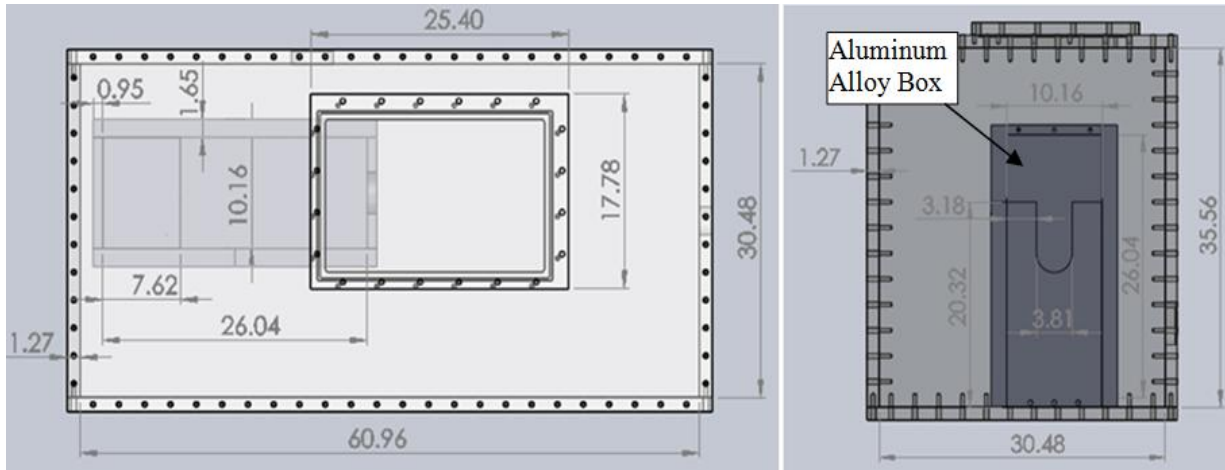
Top view and side view of the polycarbonate enclosure and aluminum box (all the dimensions are shown in cm).
